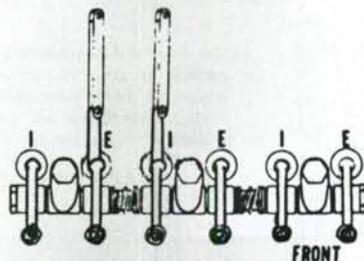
With No. 1 piston on TDC exhaust stroke on three-cylinder engines, adjust intake valve on No. 2 cylinder and exhaust valve on No. 3 cylinder.
